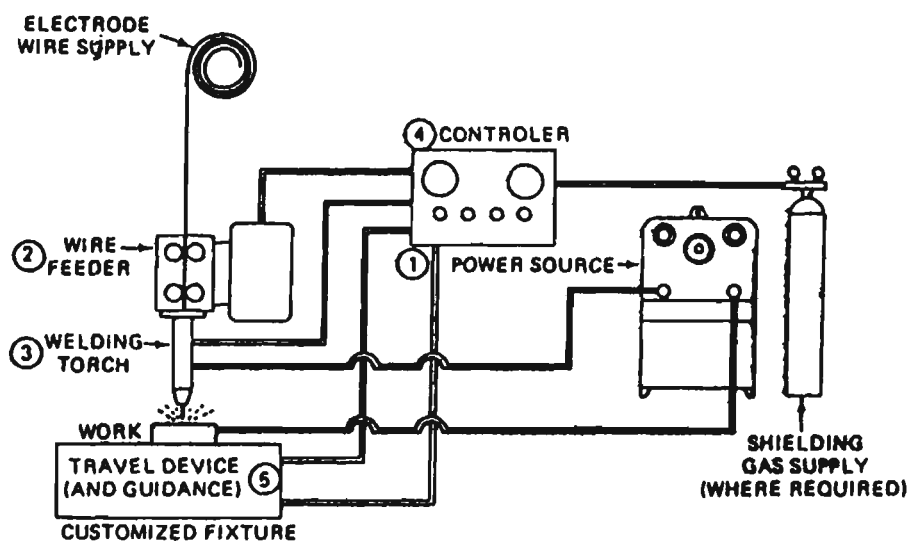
Typical early automatic arc welding system [Cary (1979)¹⁹].
